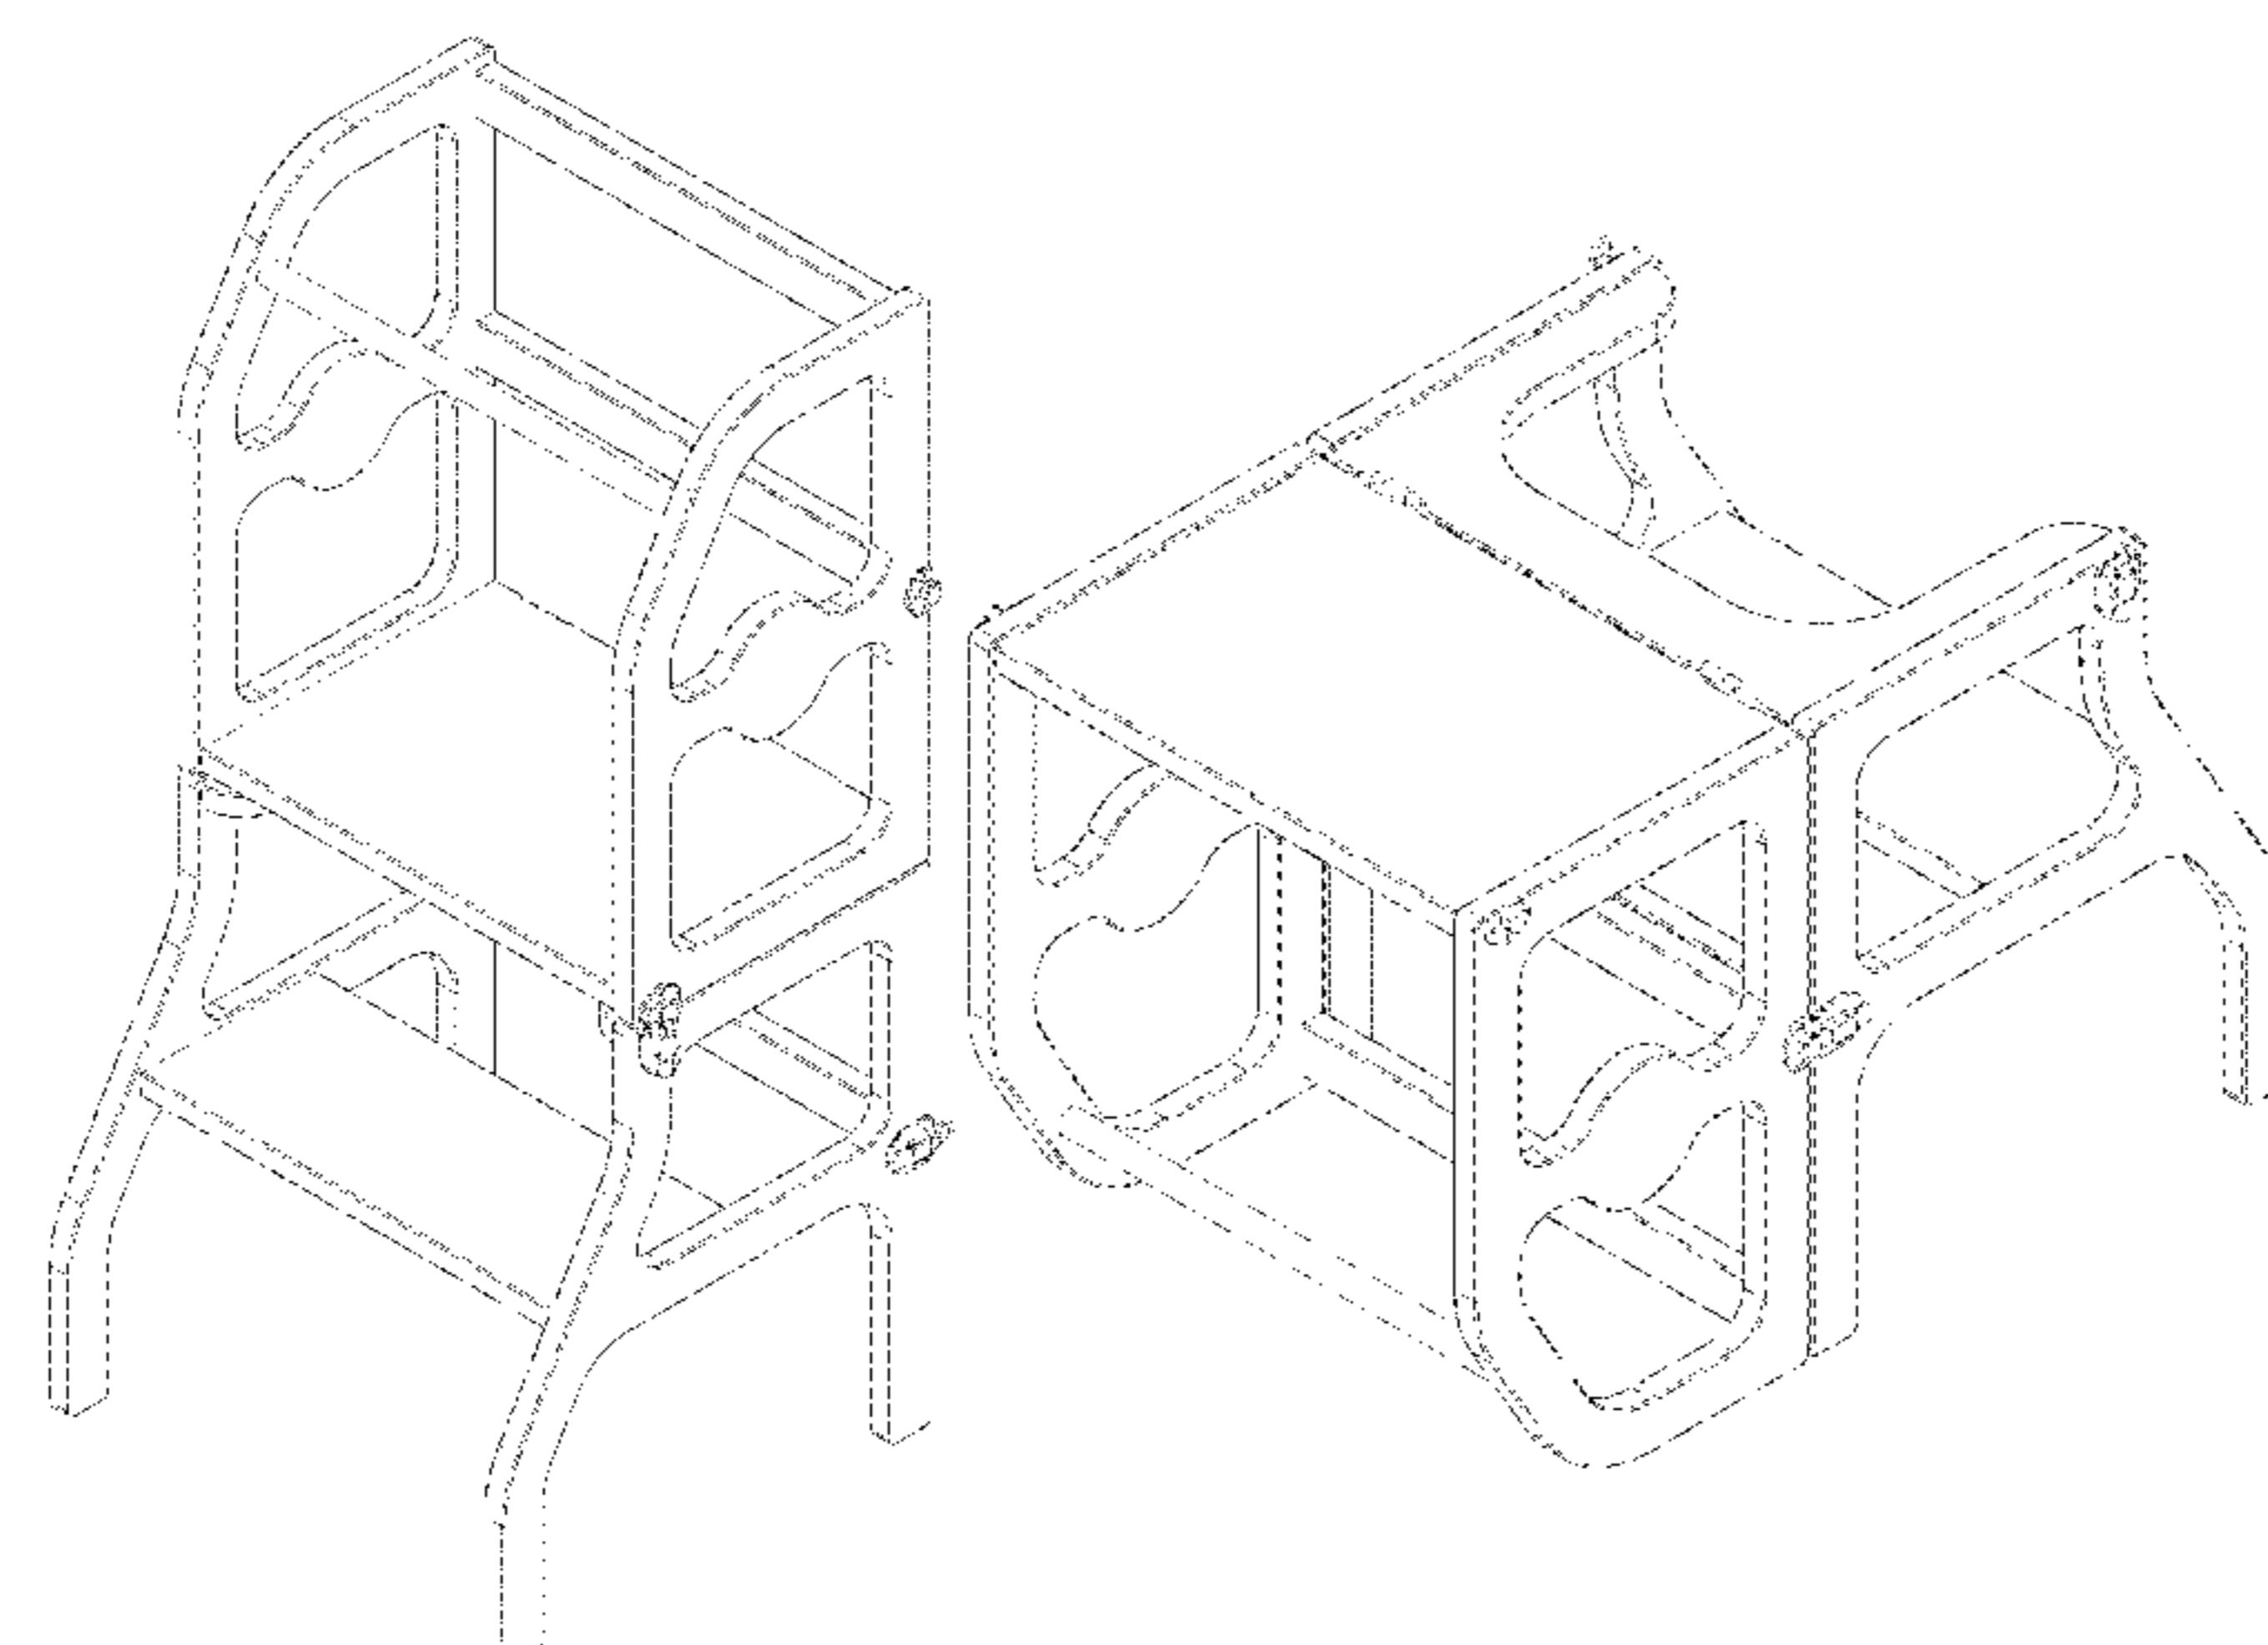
is an isometric view of the step stool in a first configuration showing a back, left side, and bottom of the step stool;
